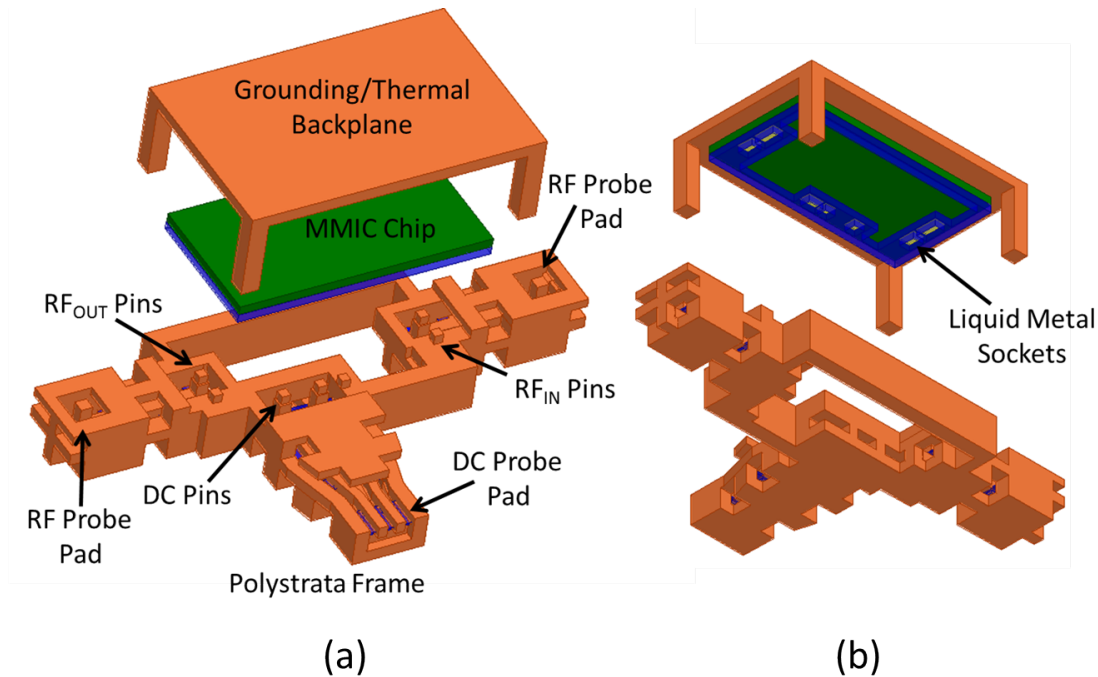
CAD rendering of the PolyStrata liquid metal, flip chip assembly: (a) an exploded view of all major parts; (b) an angled view showing the MMIC with its border of SU-8, creating the socket feature at the MMICs bond pads.
